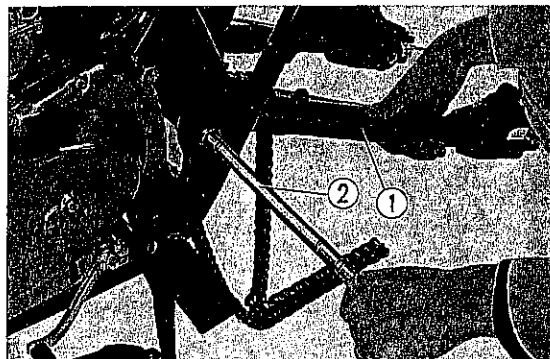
① Rear fork ② Rear fork pivot shaft
